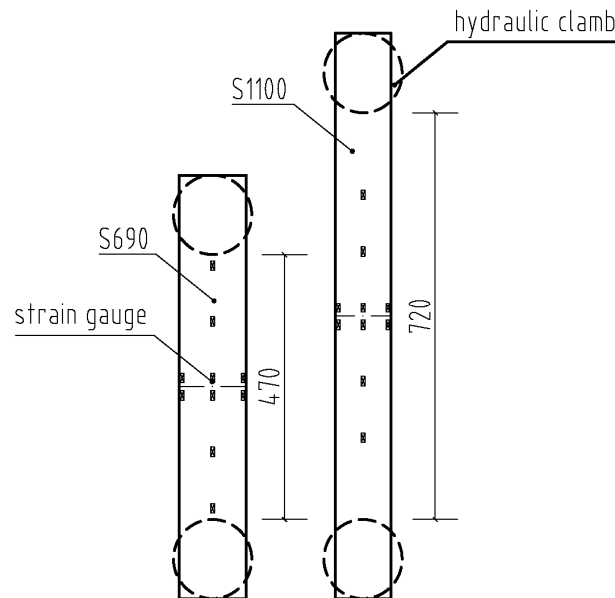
Transverse Butt Weld Fatigue Specimens
